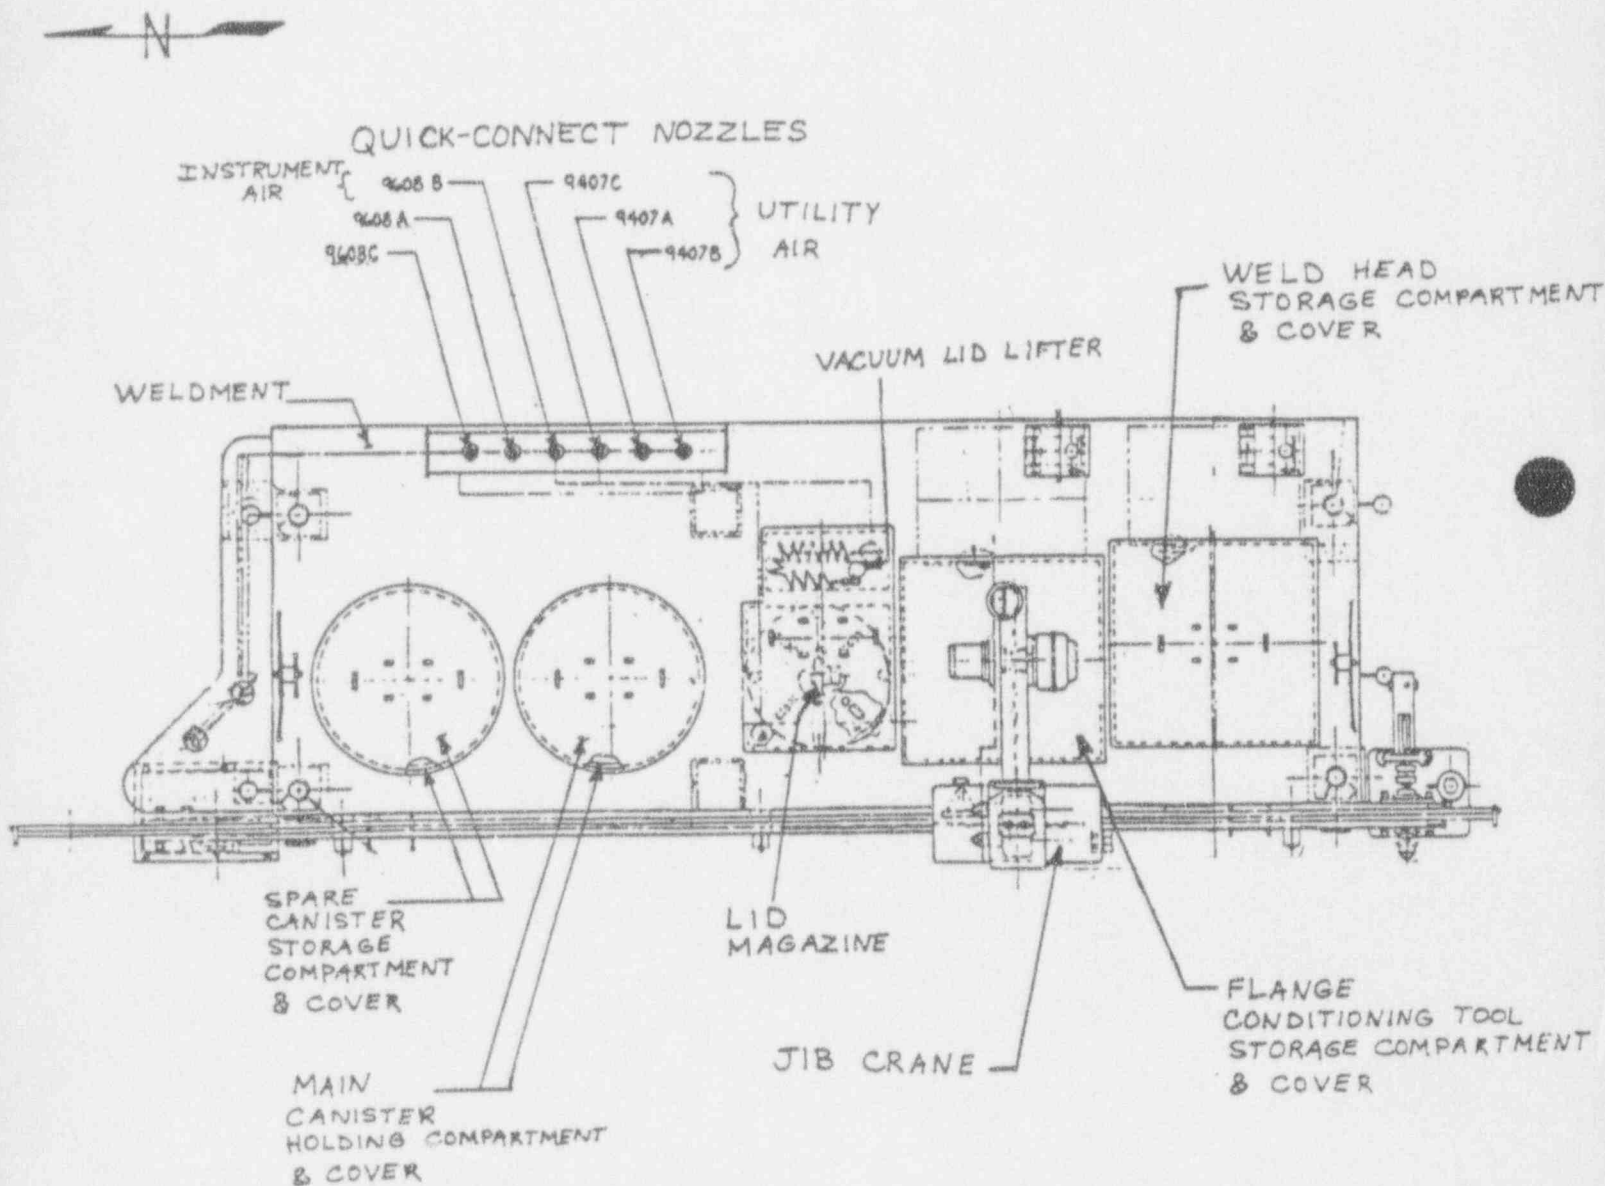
Weld Station Enlarged Plan View
